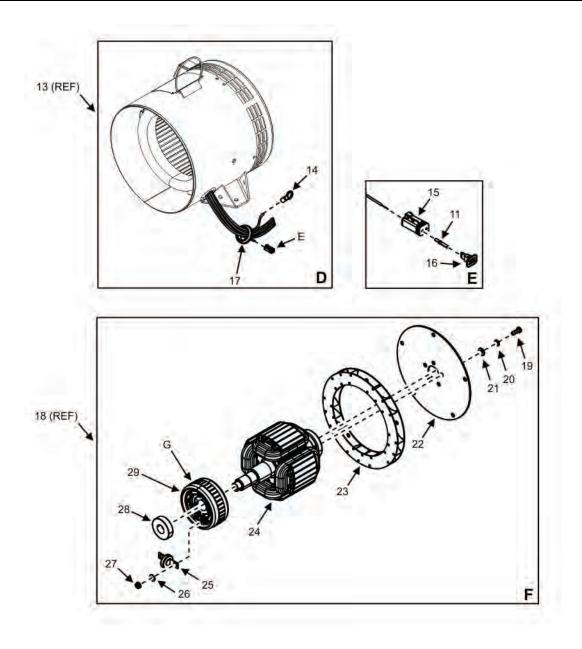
AC Generator Assembly, 50/60 Hz (Sheet 3 of 4).
